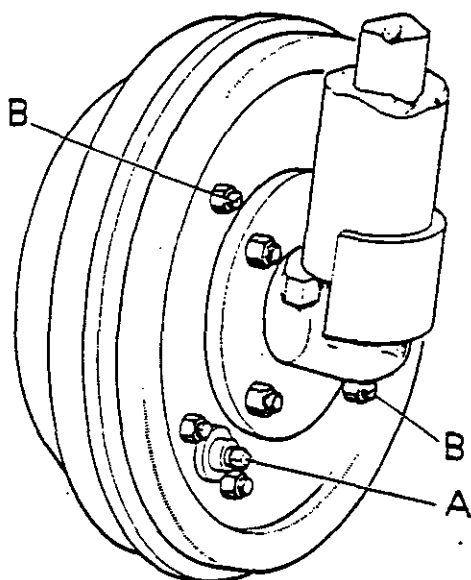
FRONT WHEEL BRAKE ADJUSTMENT
